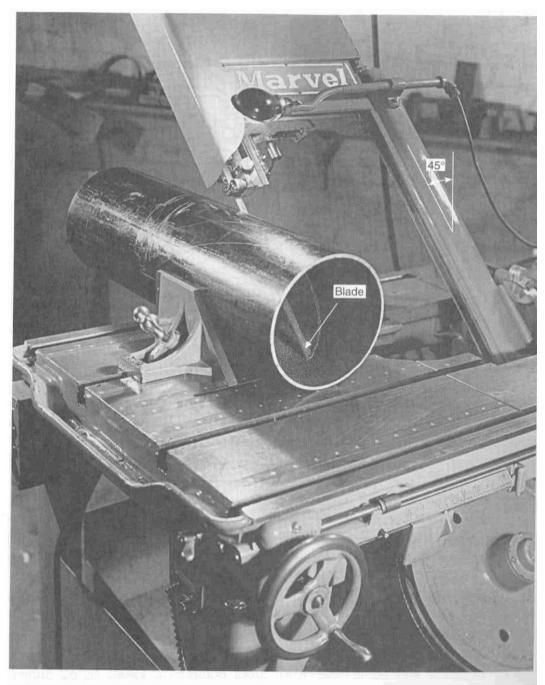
Cutting a pipe at a 45° angle on an upright cutoff bandsawing machine. (Courtesy of Armstrong-Blum Mfg. Co.)
